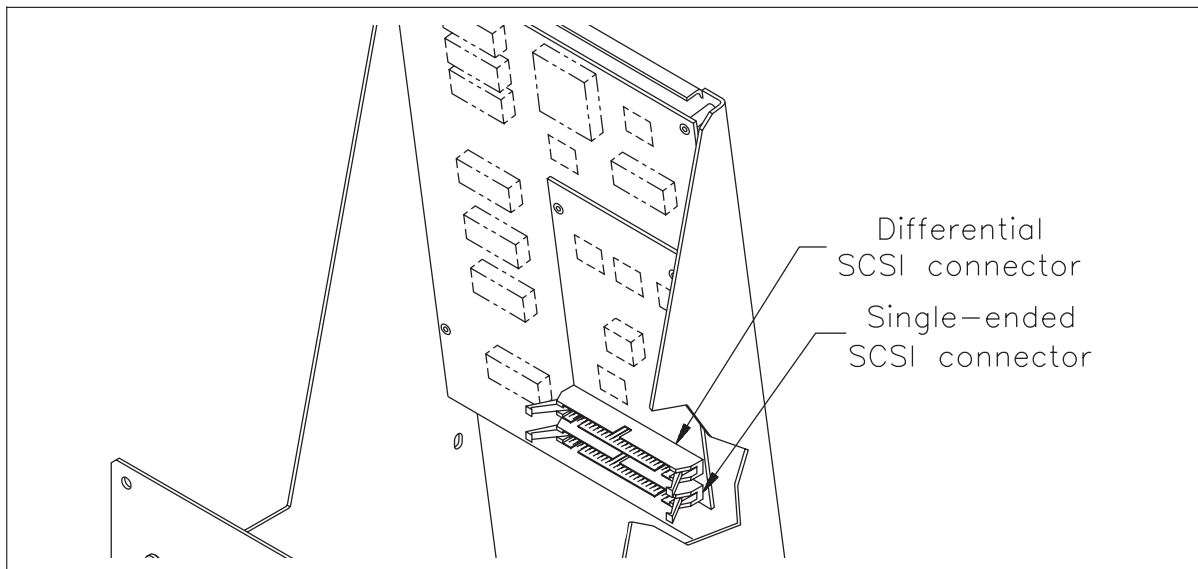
Connecting the tape drive SCSI cable to the SCSI card
